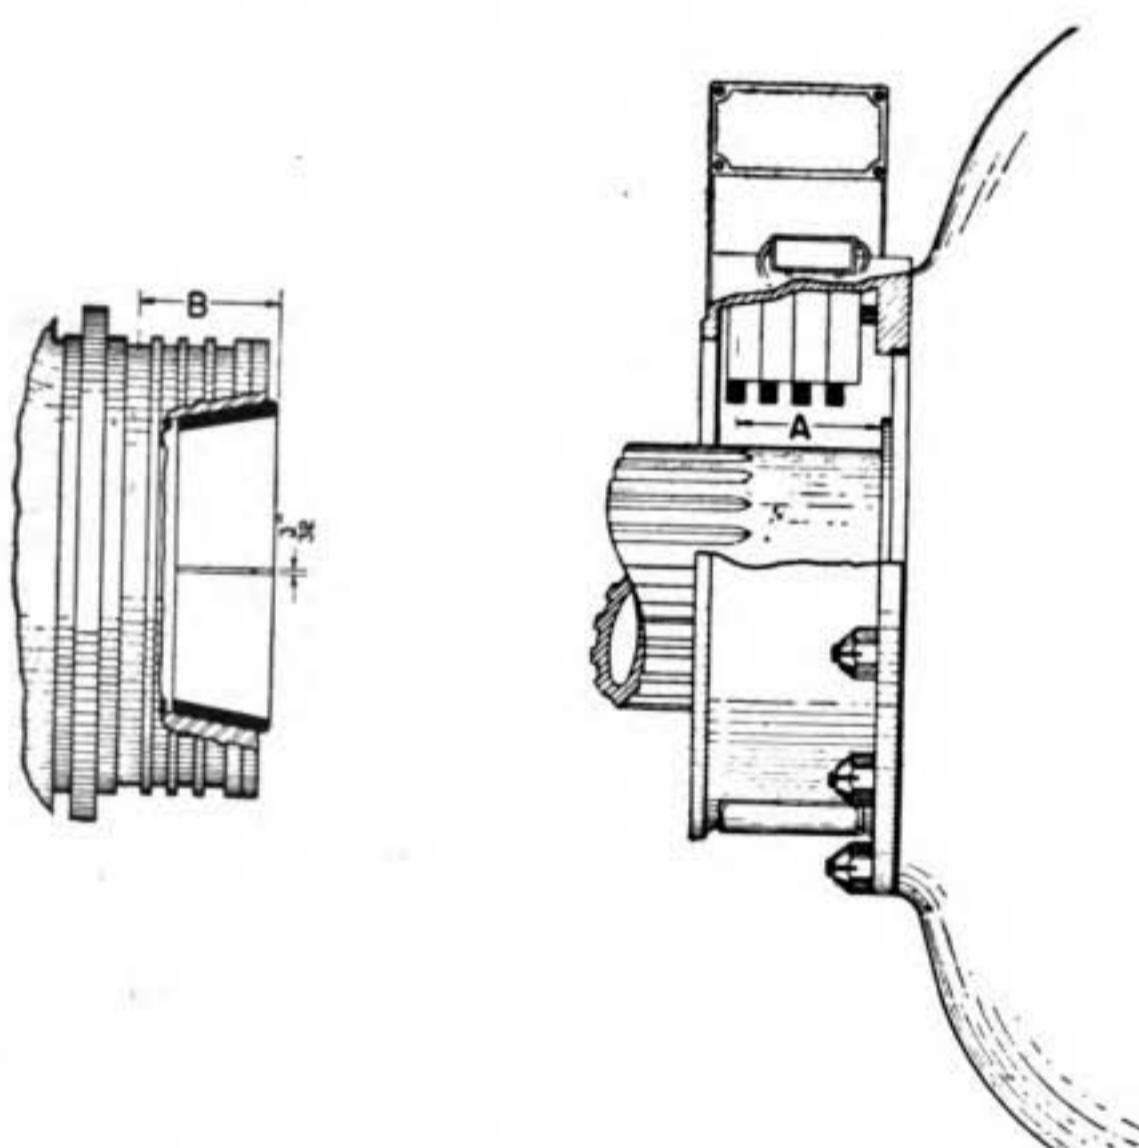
Predetermining the location of brush contacts on slip rings.
